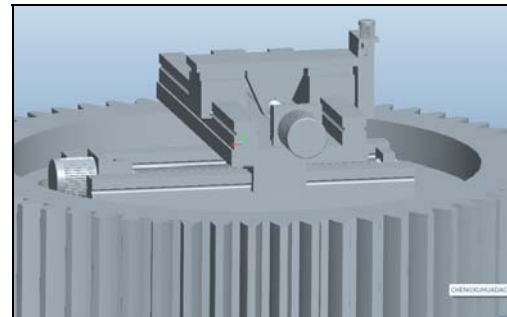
The assembly diagram of gear surface test mechanism and gear.
